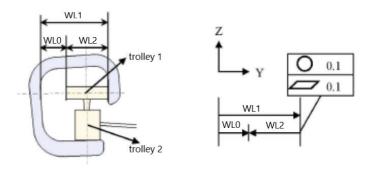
Fitting state(left) and dimensional chain with GD&T(right) in Y axis (lower set)
